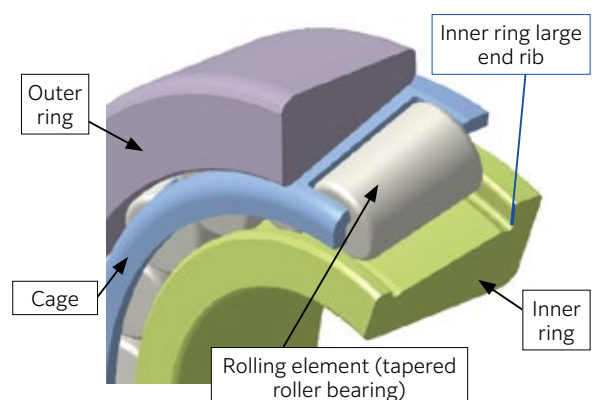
Structure of tapered roller bearing¹⁵⁾
